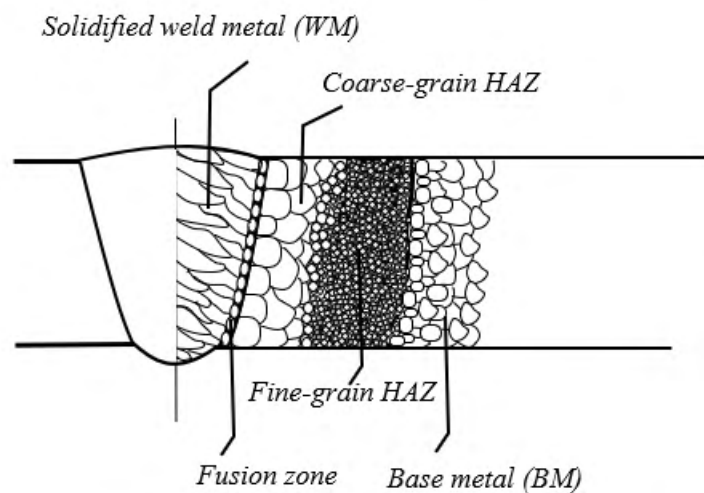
Welding theory, provided by WM, fusion zone, and HAZ
